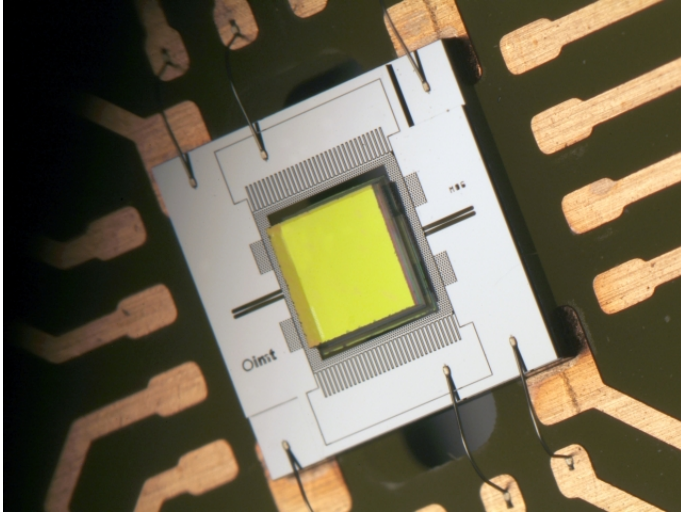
Photograph of the MEMS chip which is glued and wire-bonded onto a PCB and assembled with the RGF.
